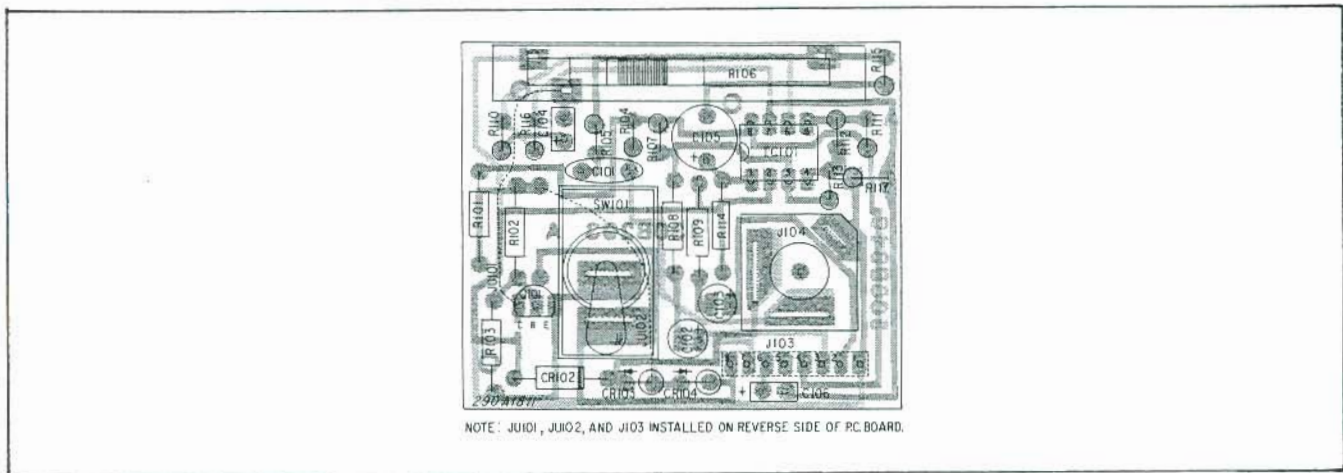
B. PA/Radio Pre-Amp. PC Board Parts Location Diagram (for units with FLA label on TB1).
